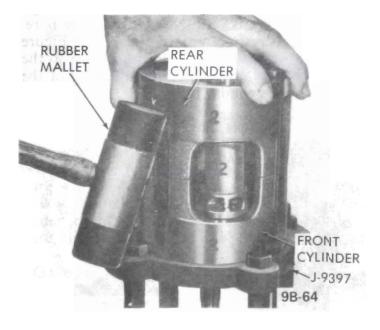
B-73 Separating Cylinder Halves card shoe discs and rear needle thrust bearing and races.
